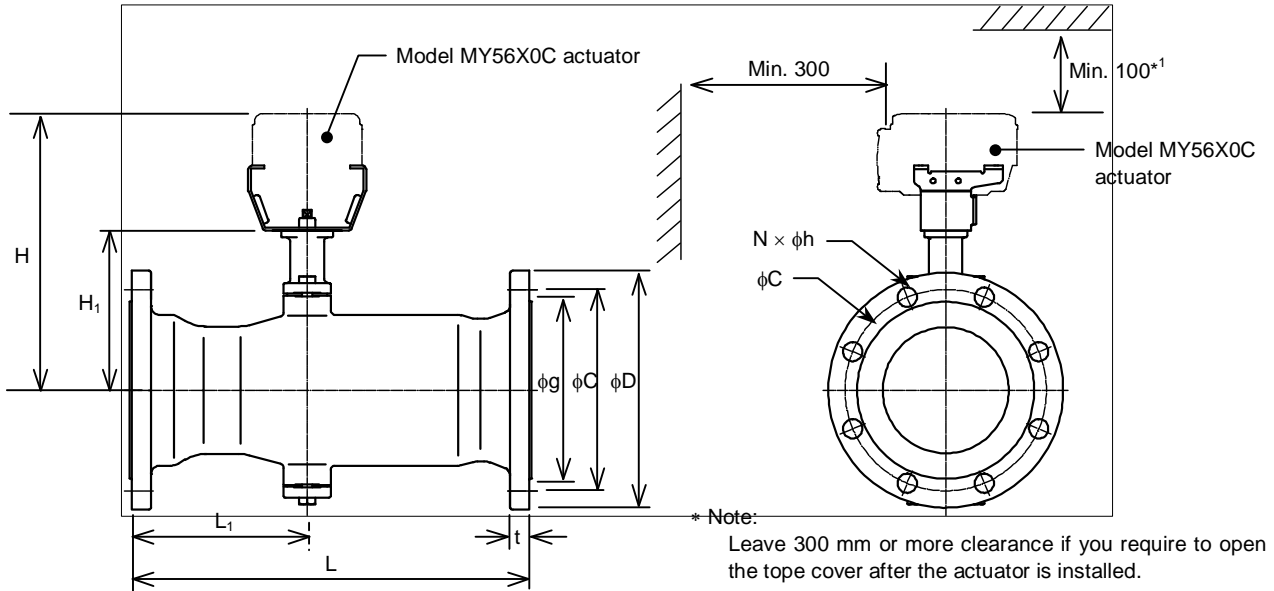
Dimensions and maintenance clearance (mm): Valve assembled with the actuator
